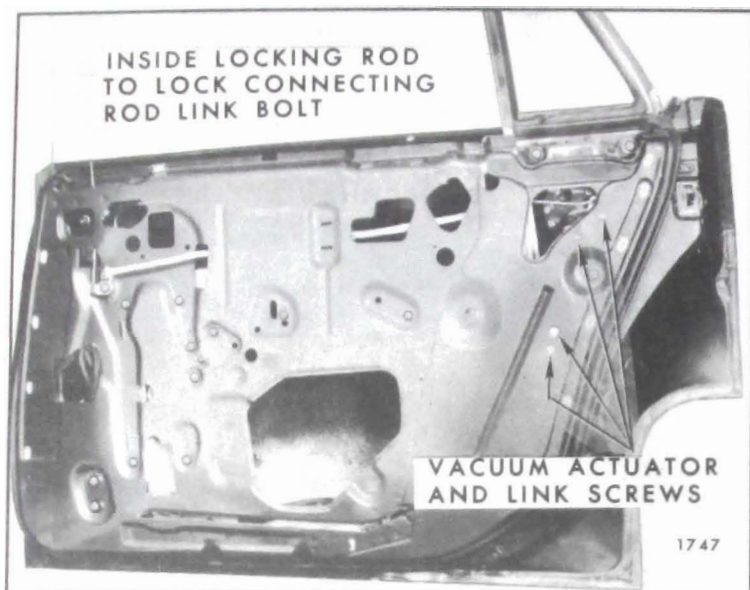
Vacuum Lock Actuator Removal - 68069-68169 Styles
